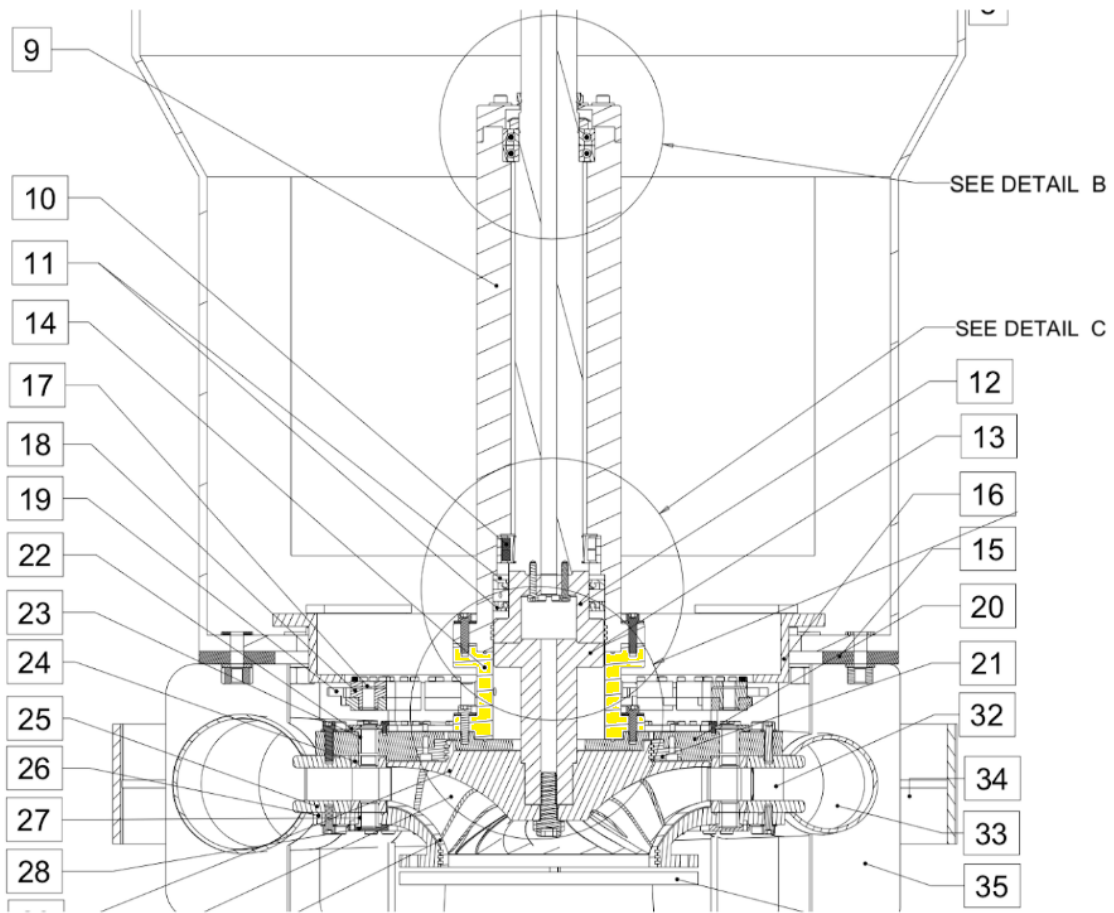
Machine drawing of the turbine at TTL and related parts, where the ATMD will replace part 14. This drawing is made by technical staff at TTL.
